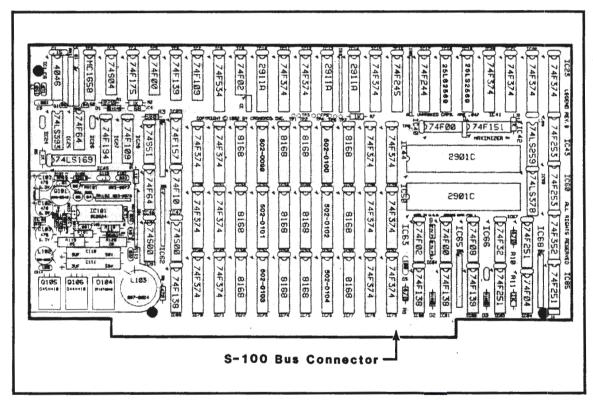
MAXIMIZER COPROCESSOR (MAX-C) BOARD
